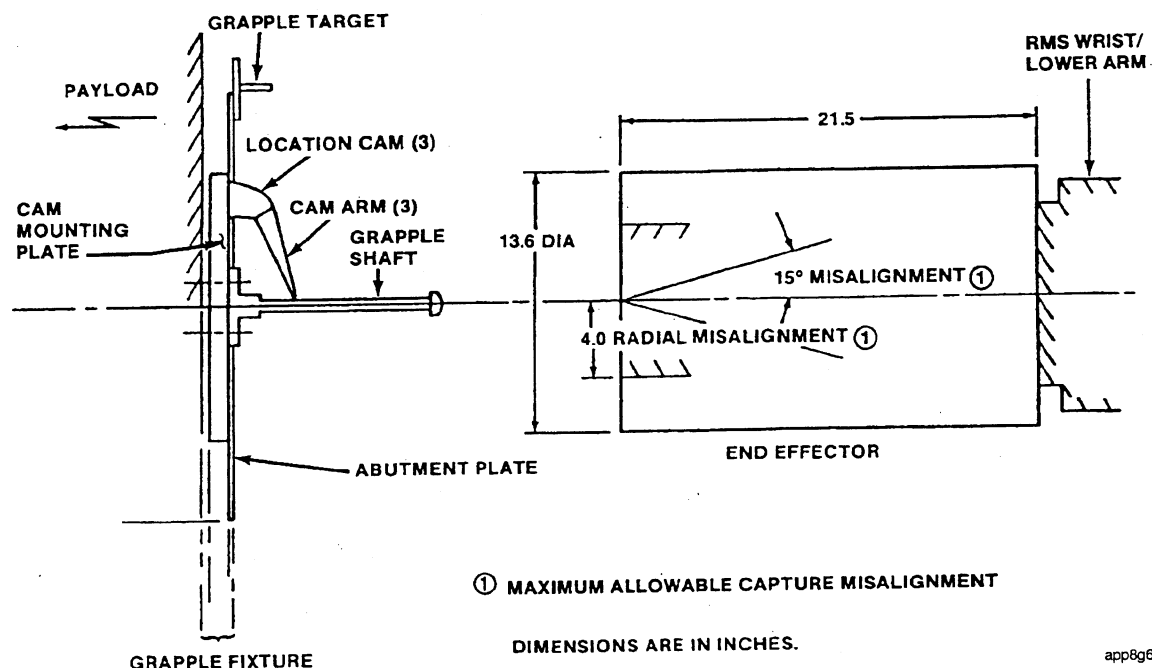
Grapple Fixture Capture Tolerances
